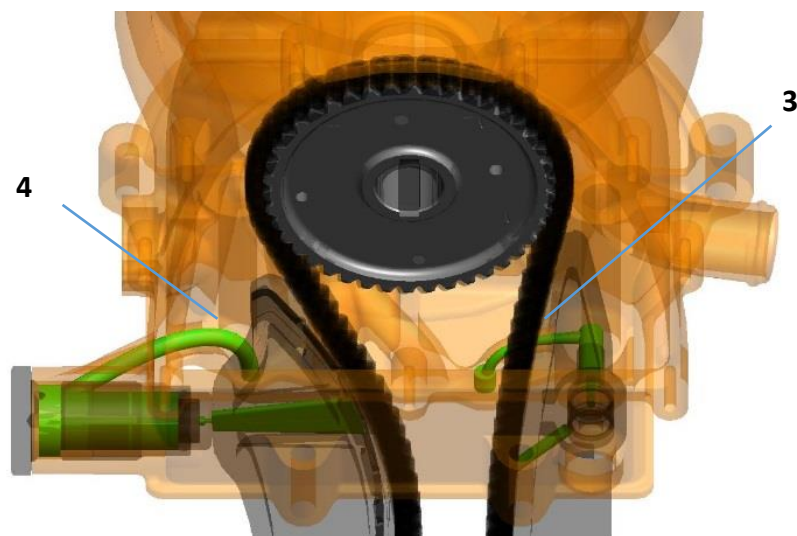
Oil channel details: feedings of chain guide rails and chain tensioner.
